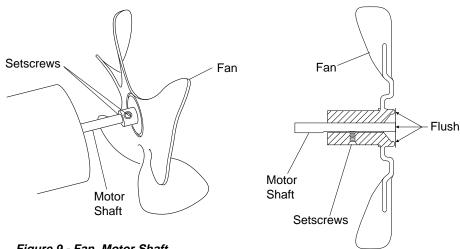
Fan, Motor Shaft, and Setscrew Location
